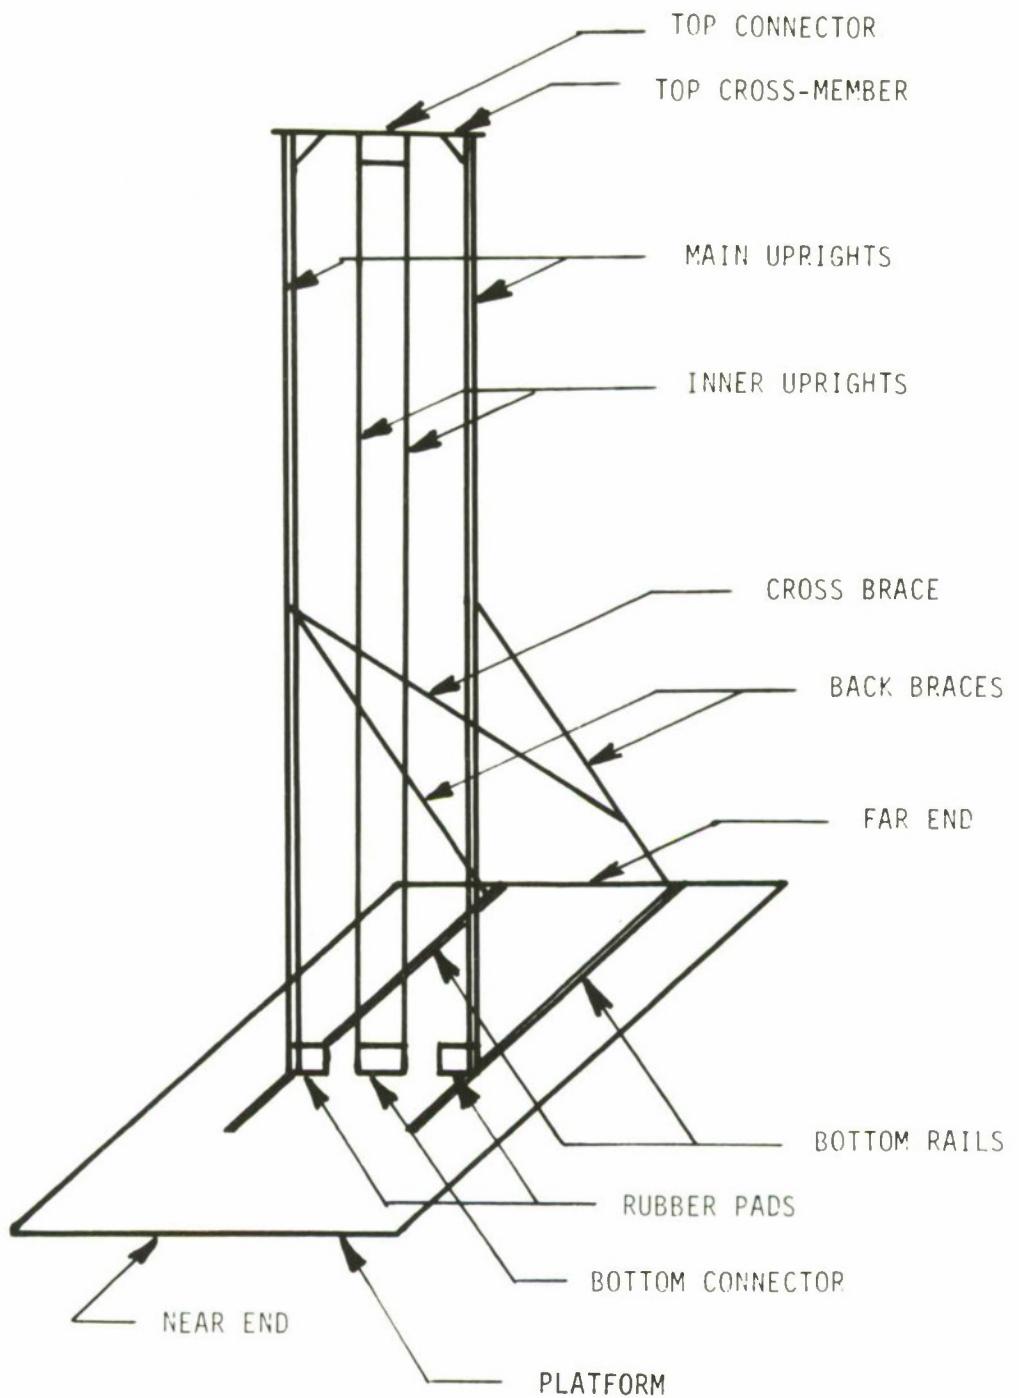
Sketch of the Frame of the Weight Lifting Machine.
